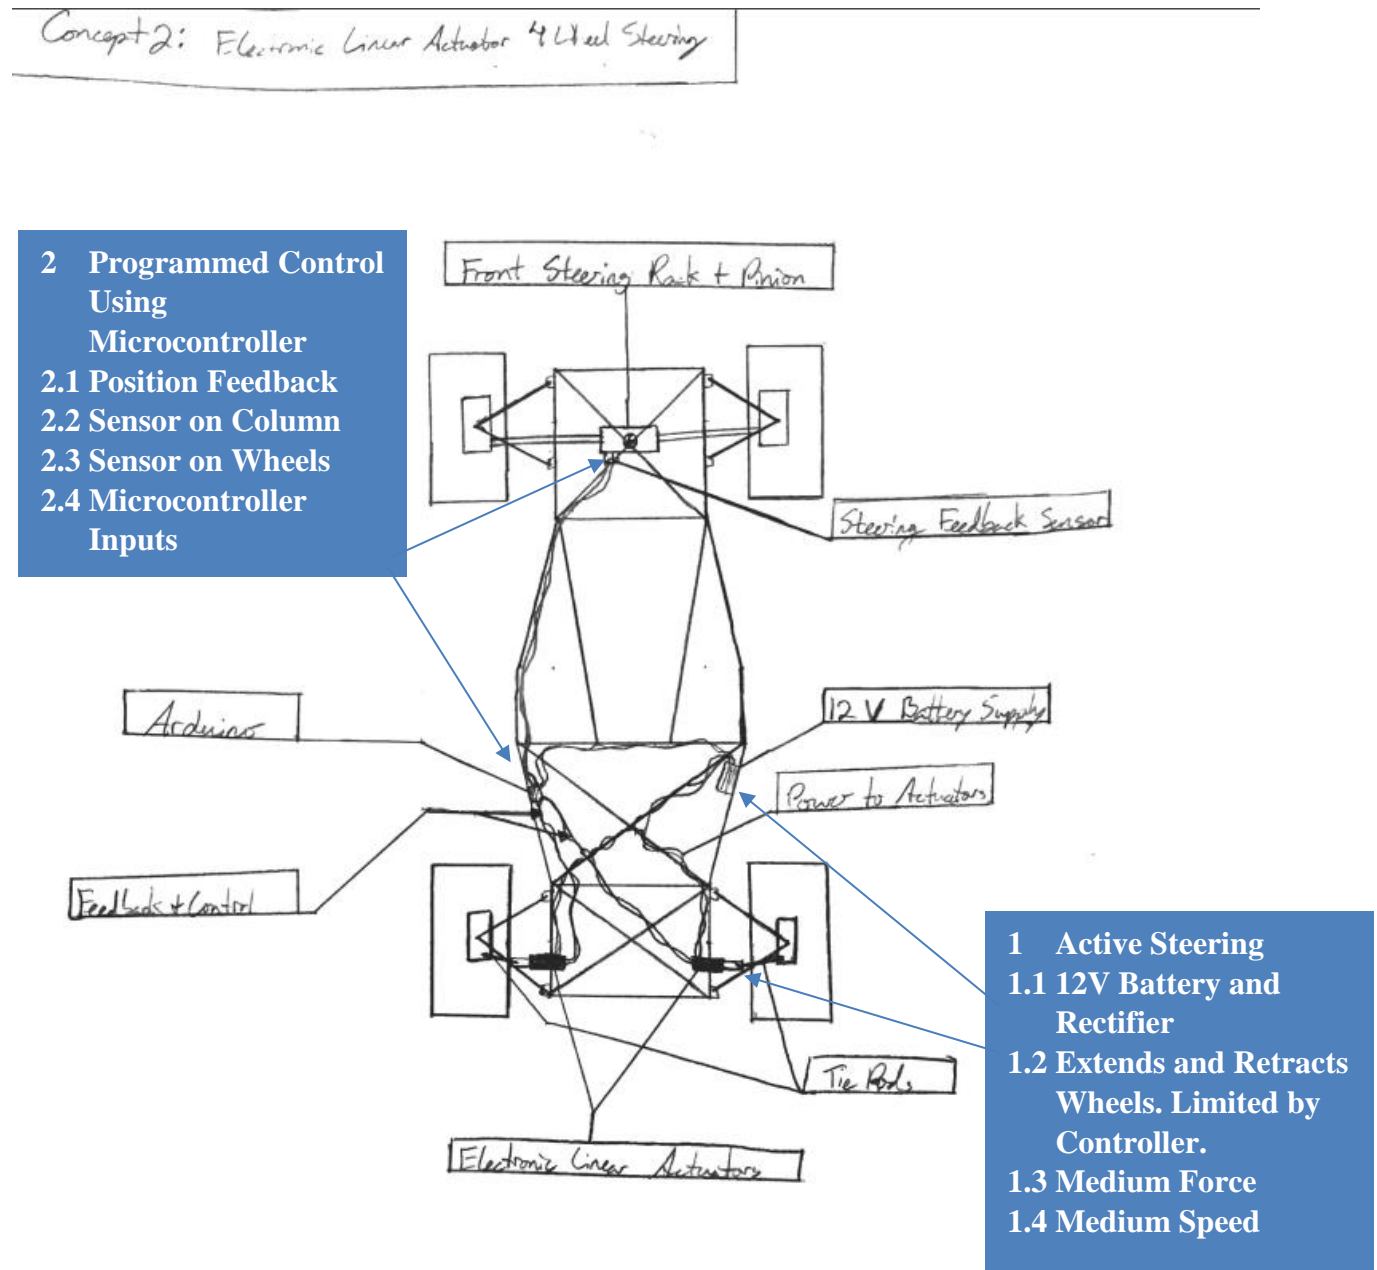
Drawing of Design Concept 2 which is for an electrical linear actuator system. An electrical linear actuator system, mounted rigidly to the frame, controlled by a microcontroller which would individually change the toe of each rear wheel through a tie-rod.
